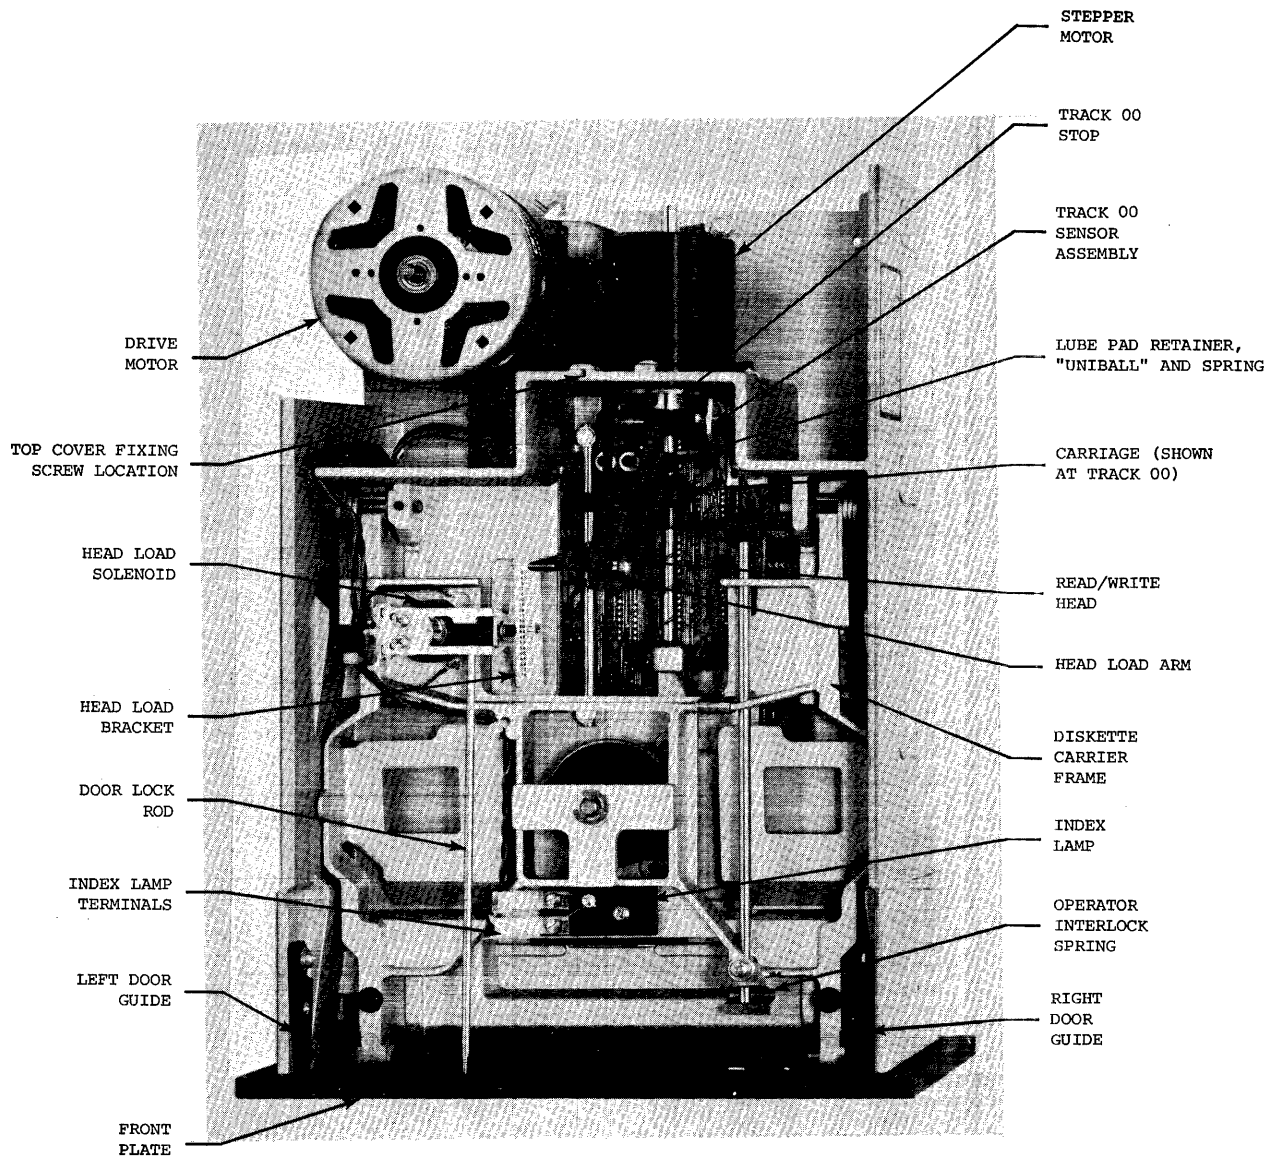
Model 76 Diskette Drive with Top Cover Removed
